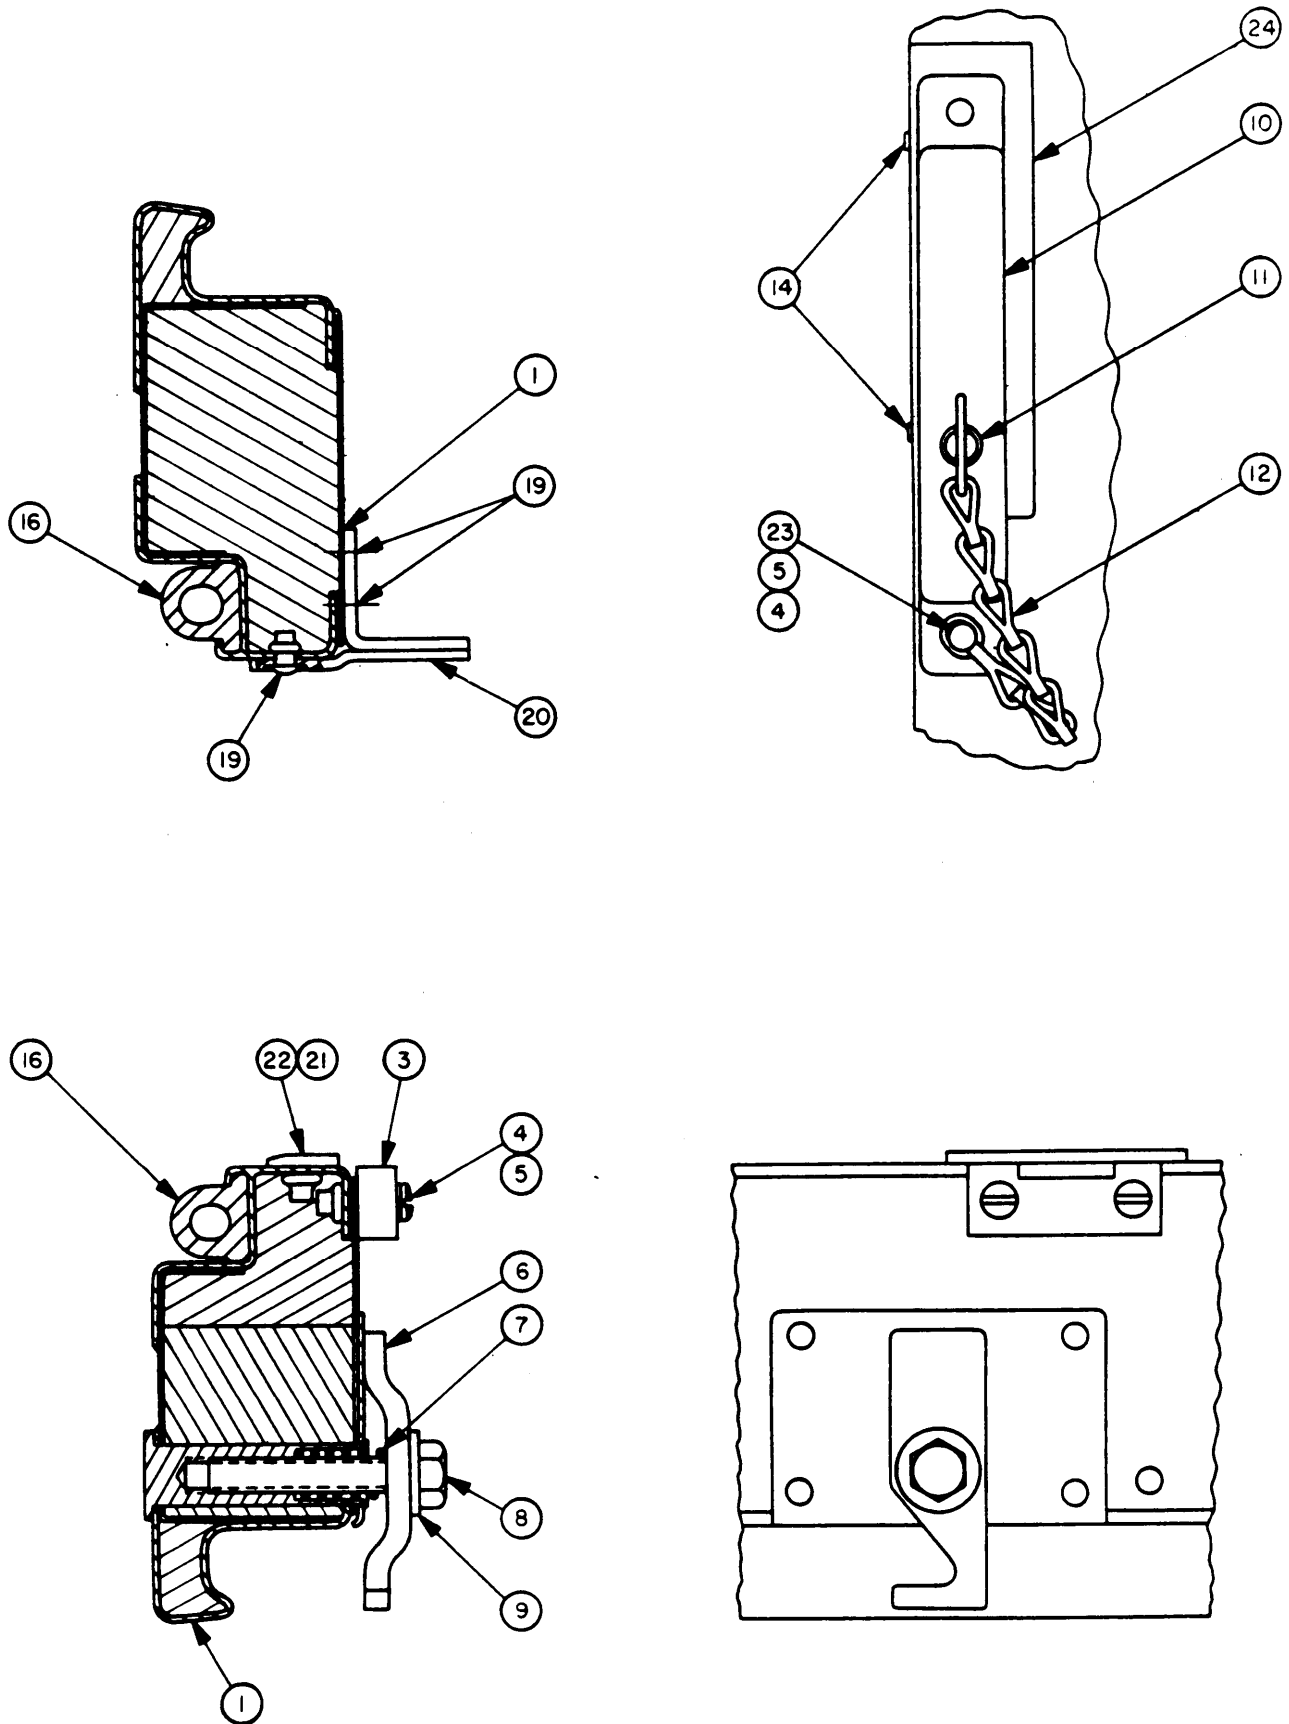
Panel Assembly, Door End (Sheet 2 of 2)
